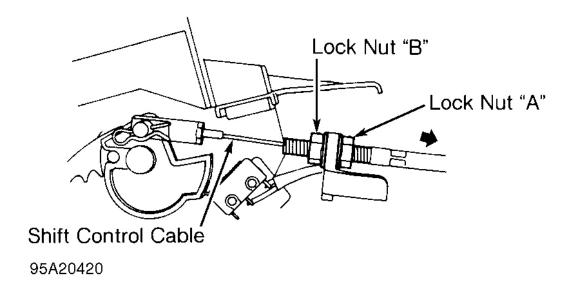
Adjusting Shift Control Cable Courtesy of ISUZU MOTOR CO.
